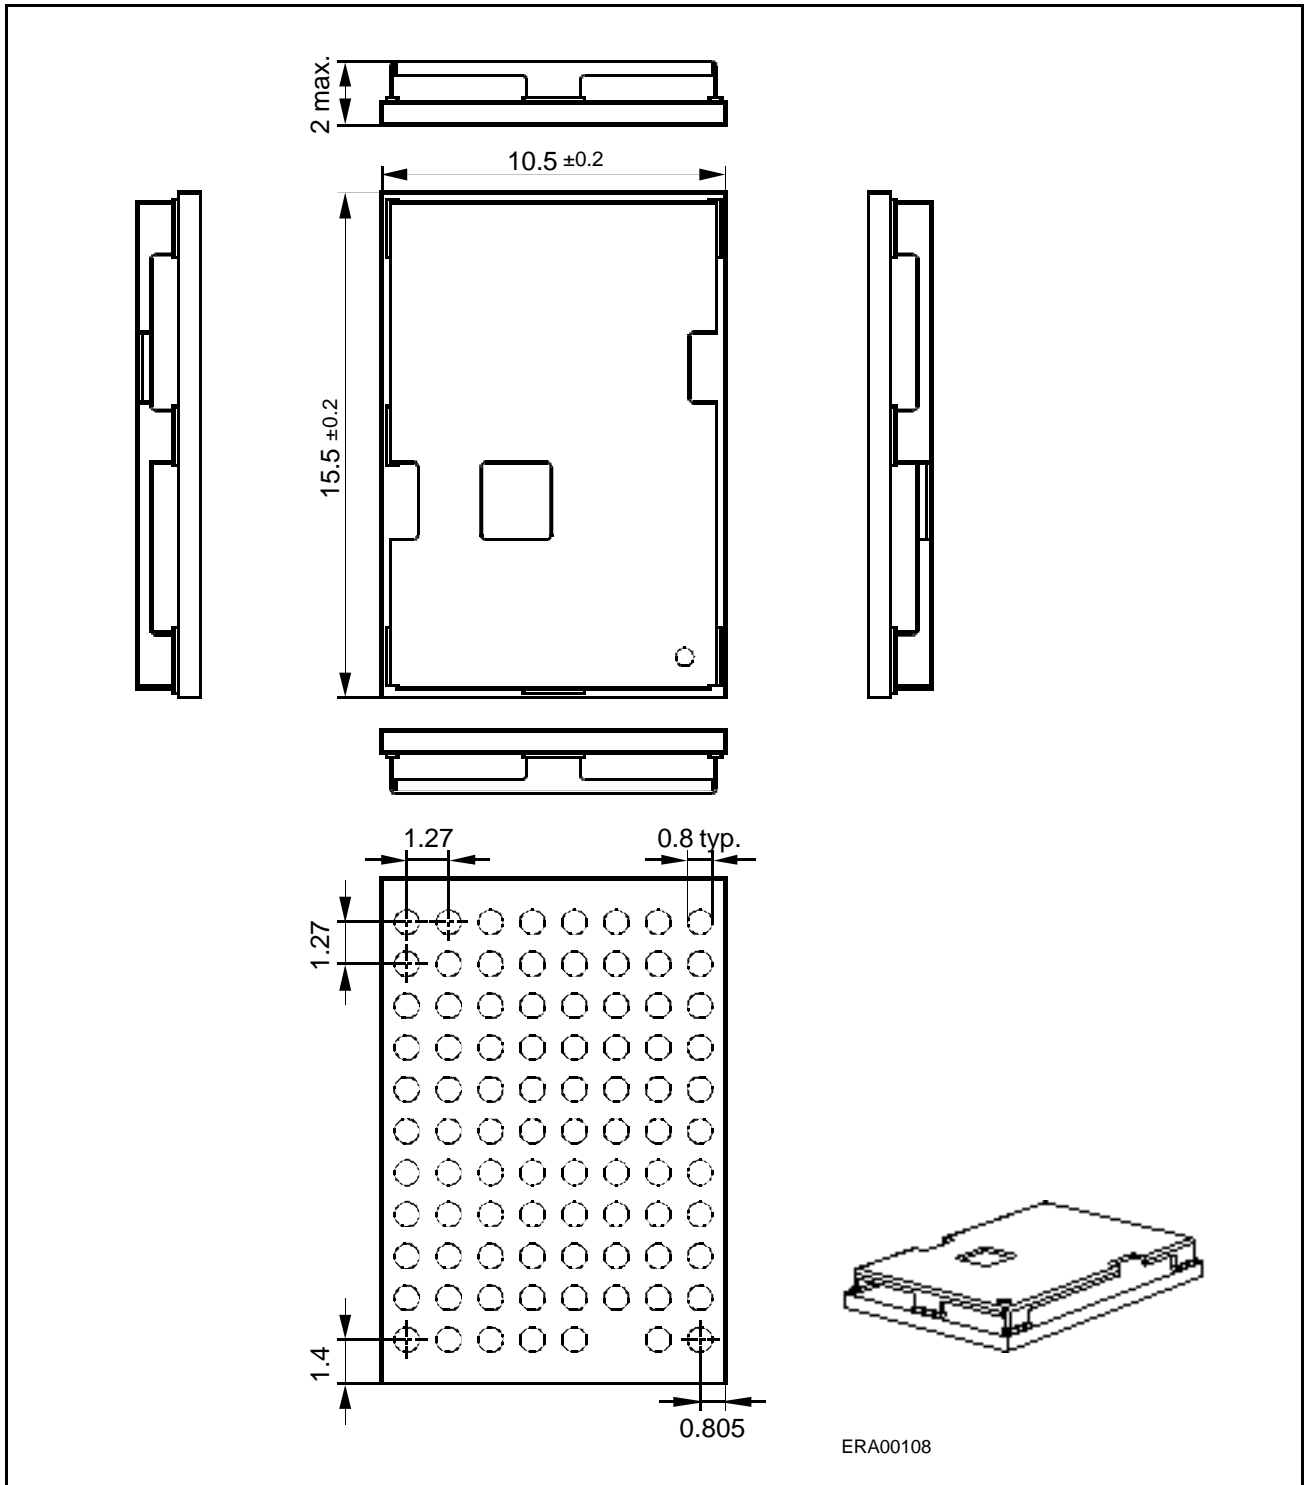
ROK 104 001 Mechanical Dimensions (maximum values) and Footprint, Bottom View
